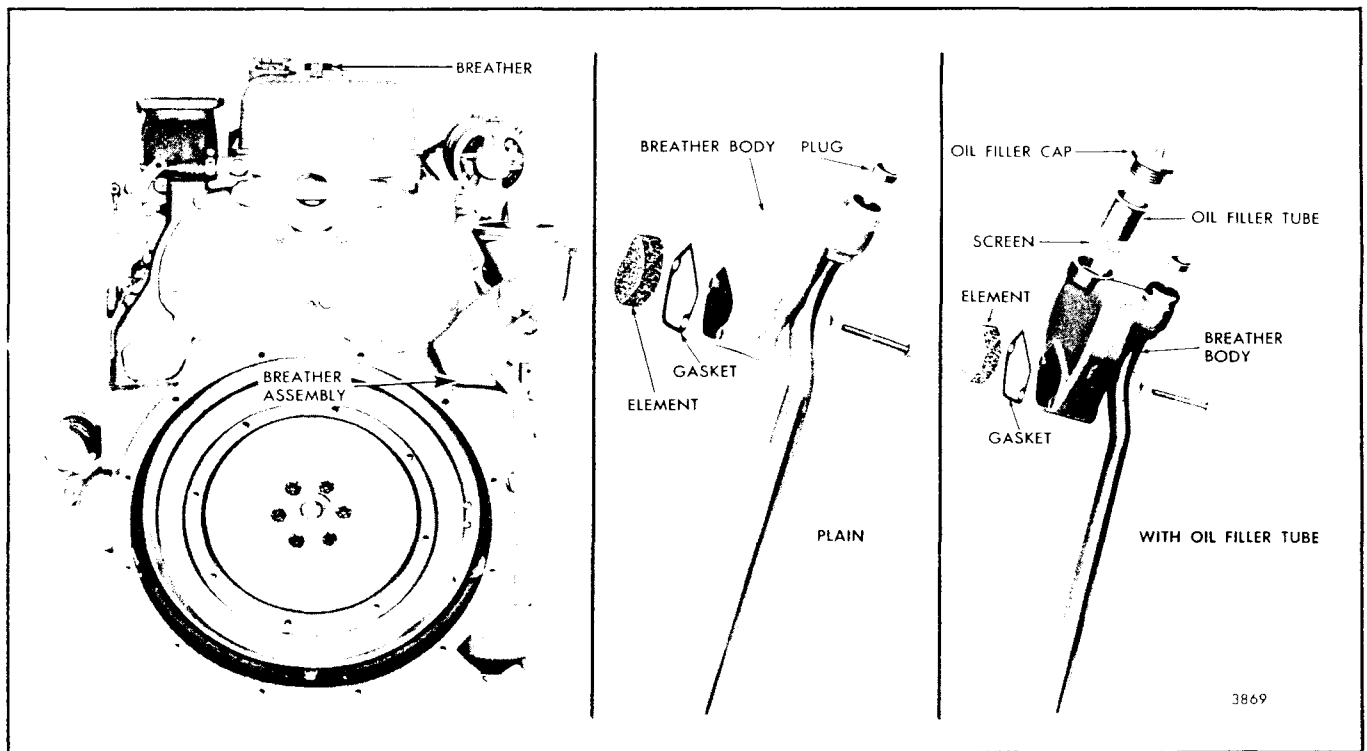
Crankcase Breather Mounting and Details (In-Line Engine)
